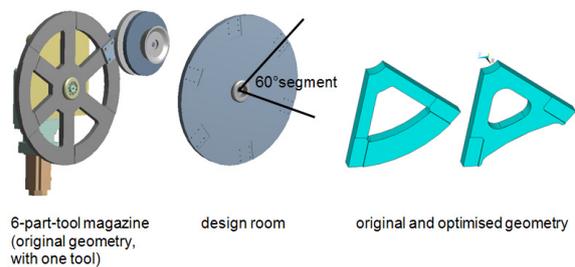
Topology optimisation of a tool magazine of a grinding machine.
